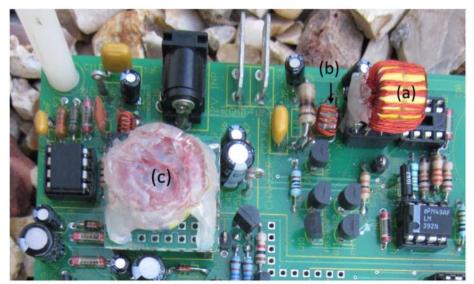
Three toroid board mounts: upper-right, two stacked T44-26 cores on an 8-pin header (a); left of (a), stacked T26-26 cores with inductor leads soldered directly into board (b); lowerleft, coupled inductor with leads soldered directly to a protoboard (c) with 0.1 inch pins descending into 0.1-in. single in-line (SIL) sockets beneath.
